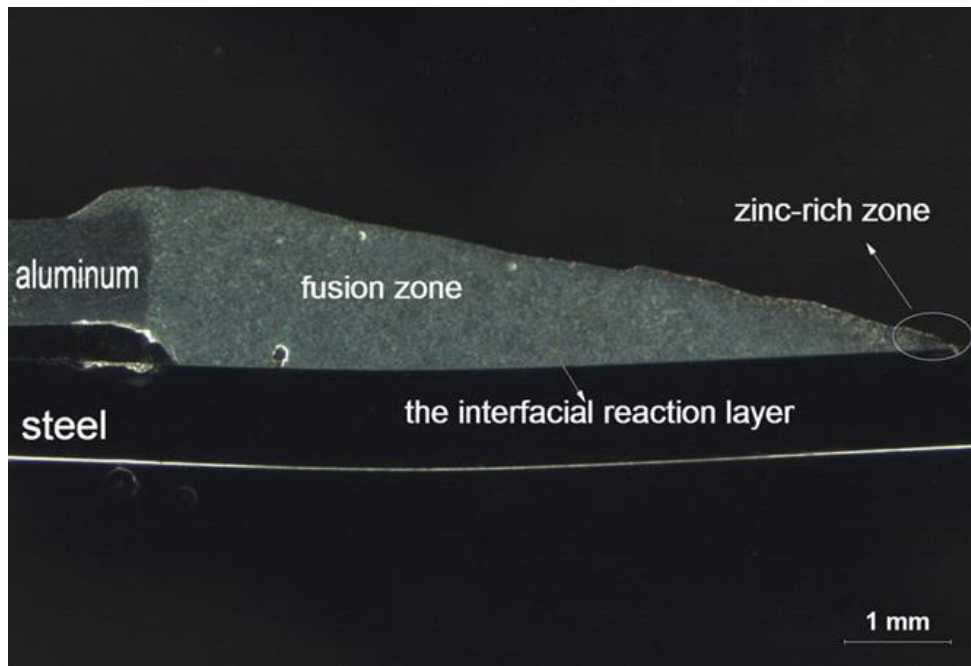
MIG brazed welding with Al and Galvanized Steel [14]
